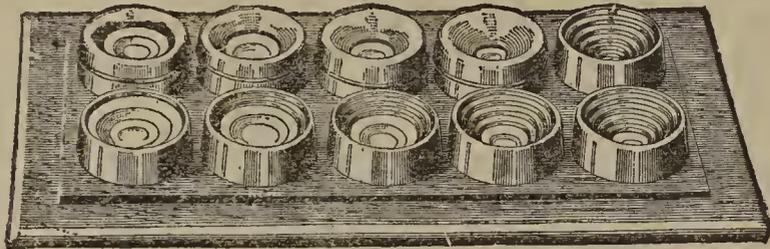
THE "CHAPIREAU" CACHET MOULDS.
